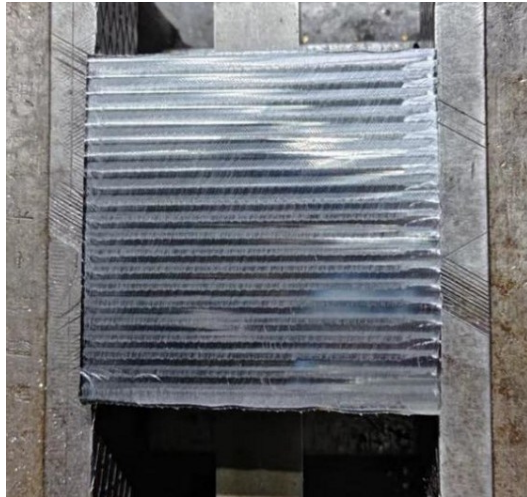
The 2Cr13 stainless steel workpiece is fixed for milling.
